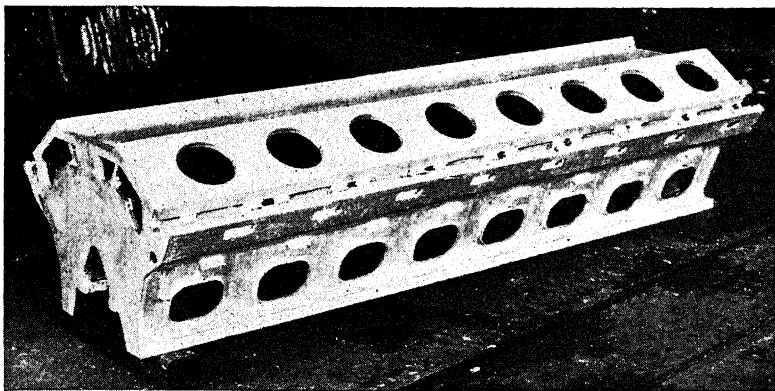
Welded Diesel engine crankcase, upper half. (*Lukens Steel Co.*)
